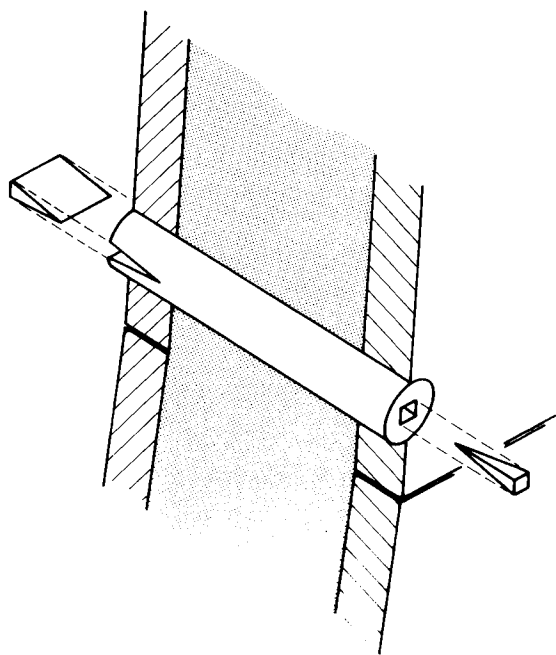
The treenail, a wooden dowel that attached the inside and outside planking against the frame parts. It was split on the inside to receive a wedge; on the outside nails or wooden pins (dotted) were hammered to close the open structure of the wood and keep water from seeping through. (Drawing by A. J. Hoving)
